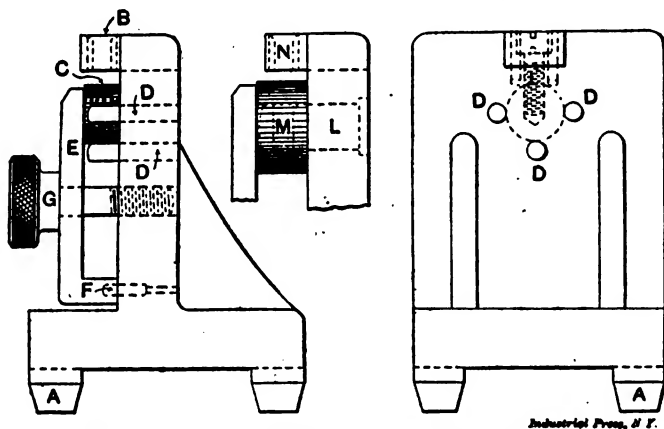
Jig for Drilling Set-screw Holes in Collars
